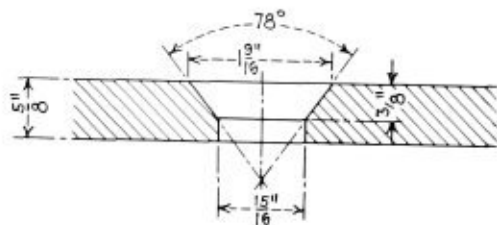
Counterbore in plate, formed from head shown in Fig. 2 or blank end
